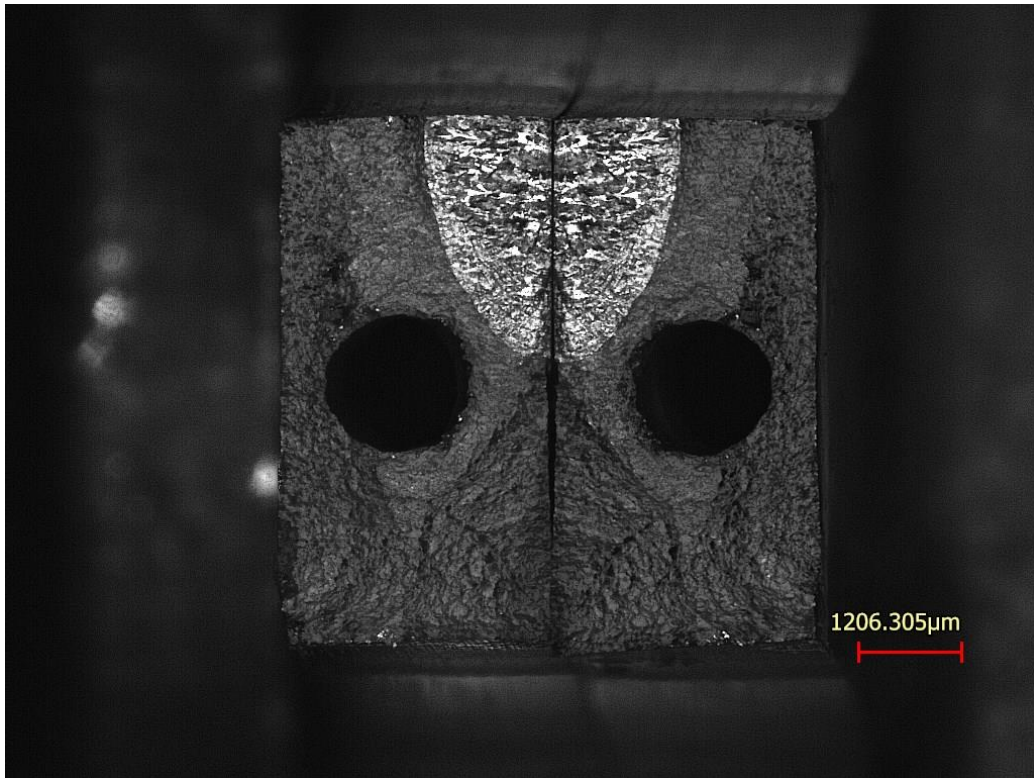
Specimen B3 fracture surface (2,000,000 cycles : 64.87 ksi / 447.3 MPa)
